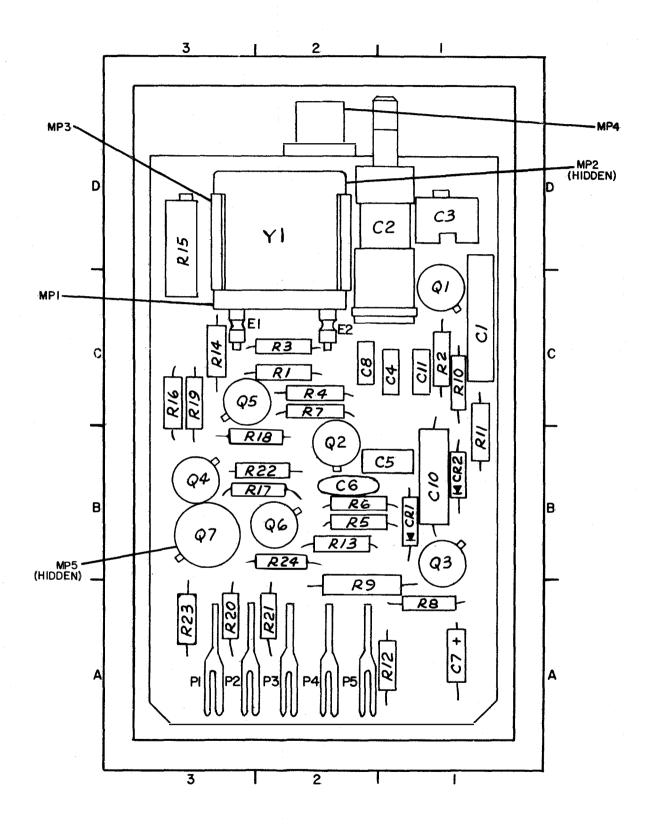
Oscillator and Oven Control Subassembly A2A5A1, Component Locations
